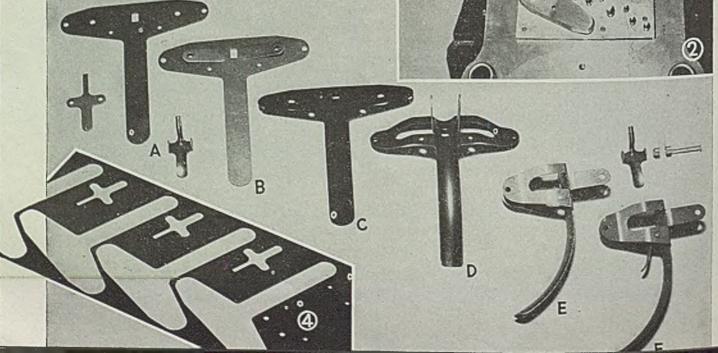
Redesigned tractor handle showing detail of steel stampings used in forming handle and latch
